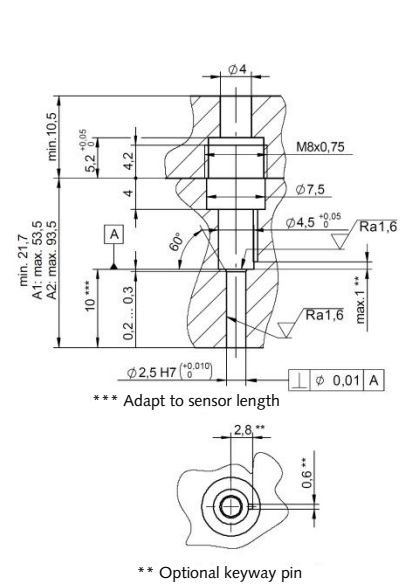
Mounting bore for installation with charge conducting spacer sleeve
